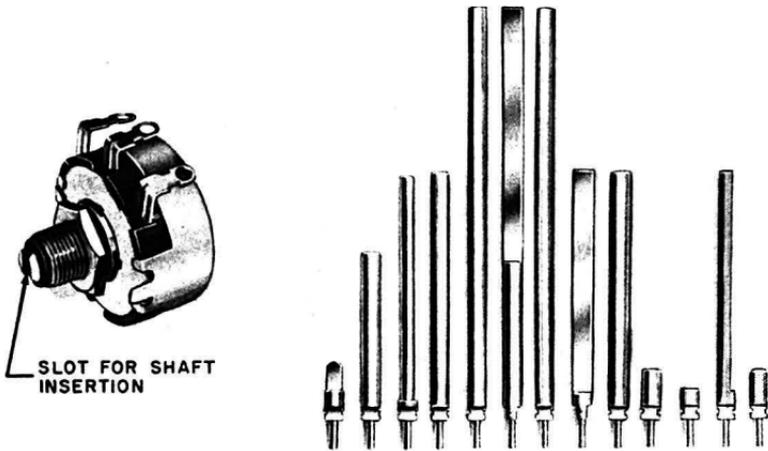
Commercial variable resistor shaft types. (A) One technique of coupling selected shaft. (B) A selection of available shafts. Courtesy Clarestat Mfg. Co., Inc.
